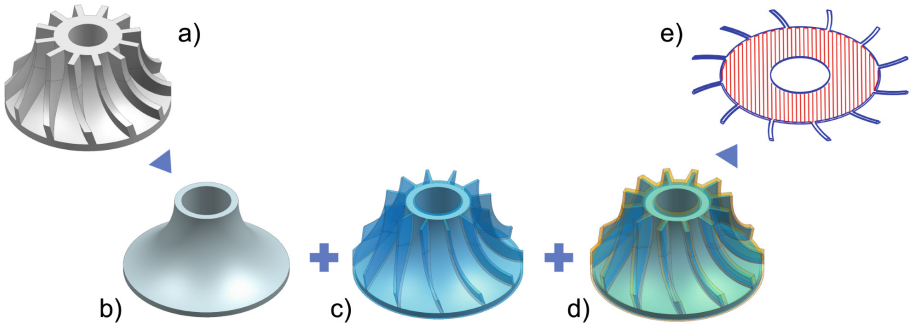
Demonstrator “milling head”: (a) CAD part, (b) STL geometry, (c) sliced layers, (d) hybrid toolpath
